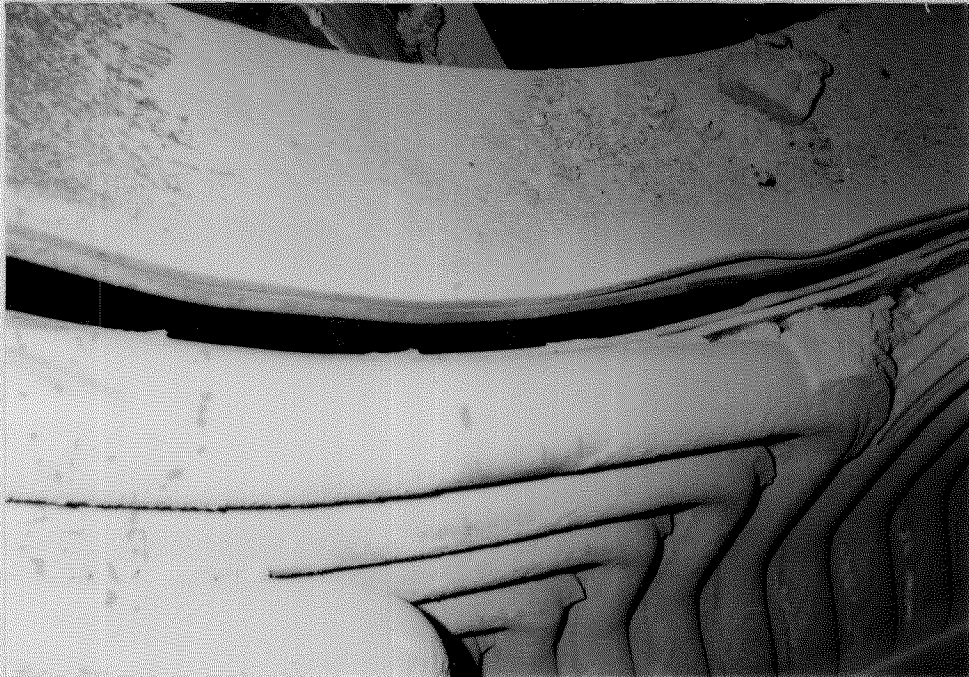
Additional photo of the burner fronts showing excessive clearances around the outside of the burner assemblies.
